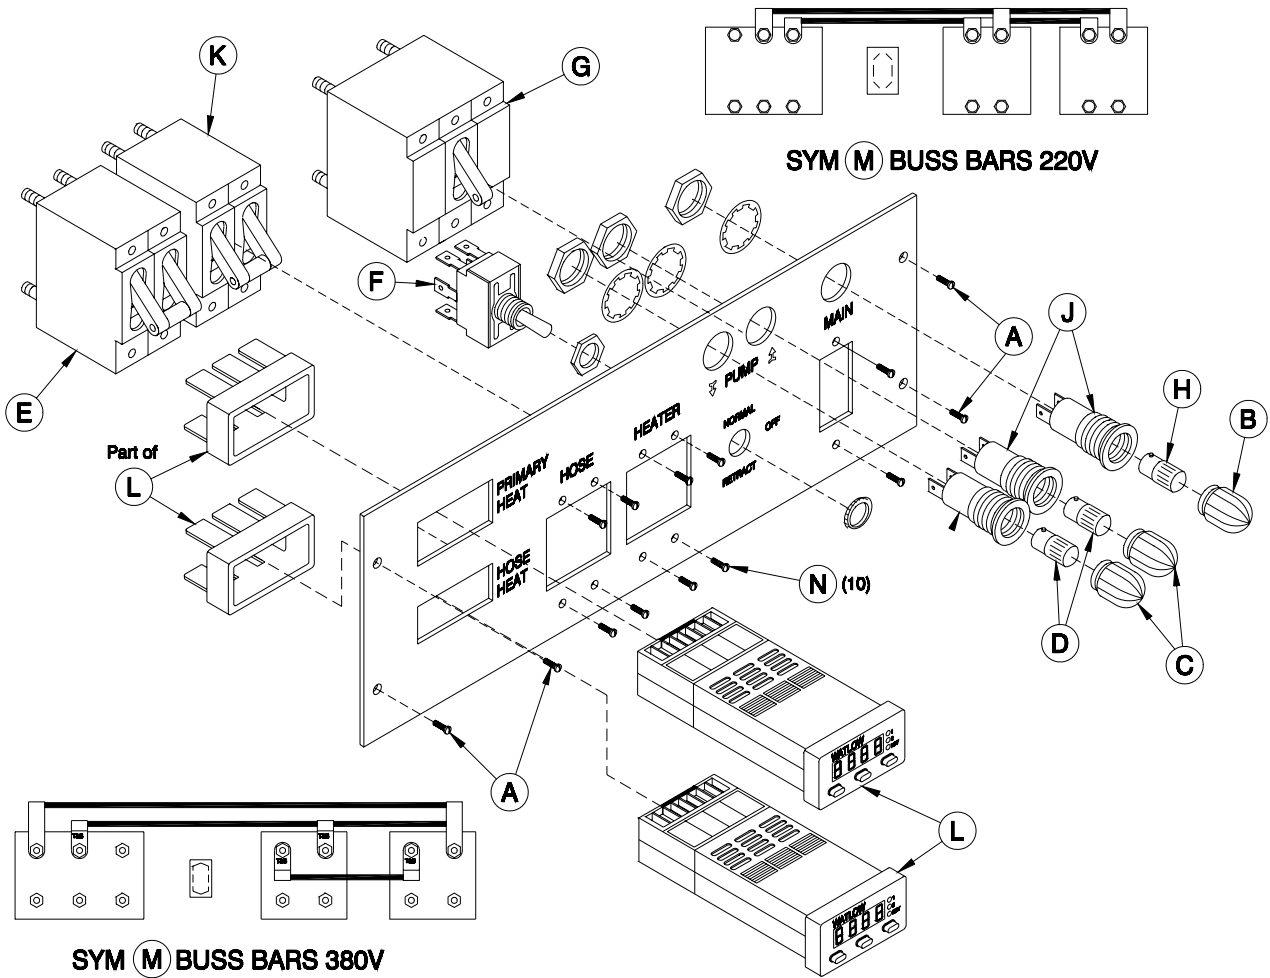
Electric Console (Part No. 25650-SIZE), Exploded View, Sheet 1 of 3
